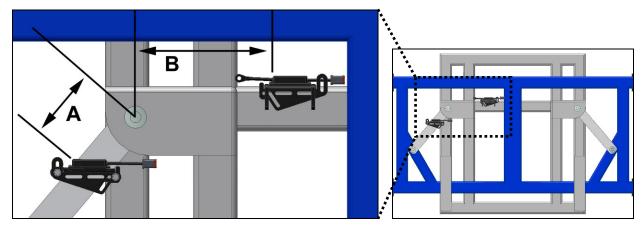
Roll Sensor Mounting on a Trapeze Suspended Boom
